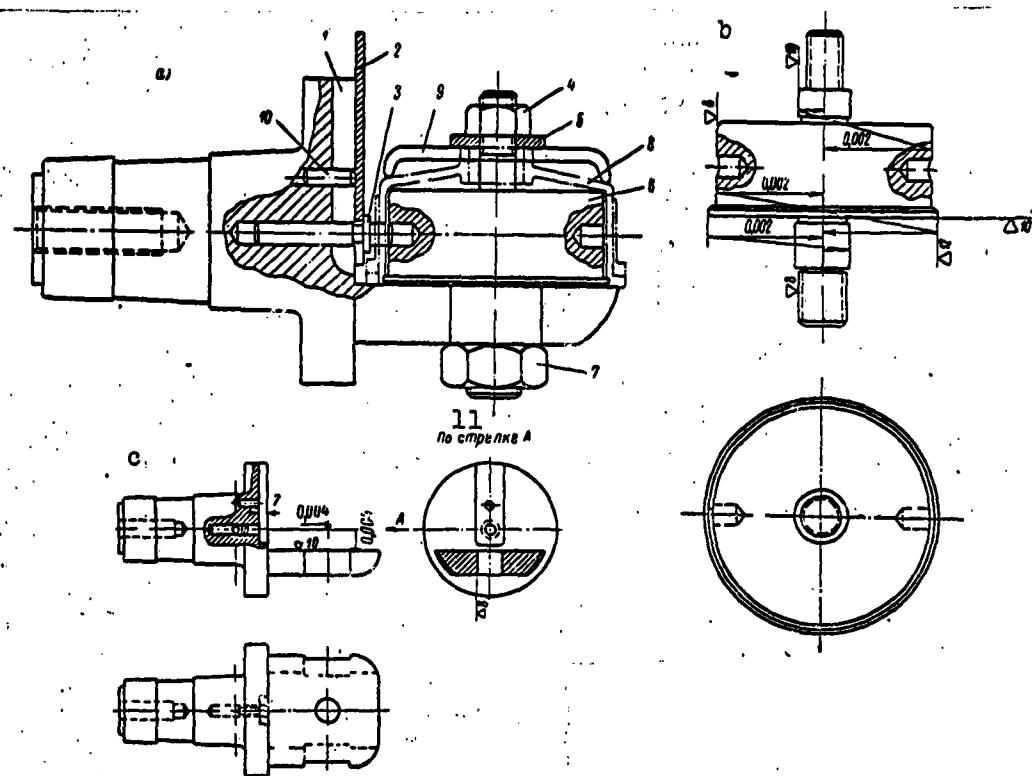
Fixture for boring journal holes (a). Mandrel (b). Locator (c). 1) Mandrel; 2) yoke; 3 and 6) locators; 4 and 7) nuts; 5) washer; 8) gyromotor housing; 9) clamp; 10) locating pin; 11) seen along A.
